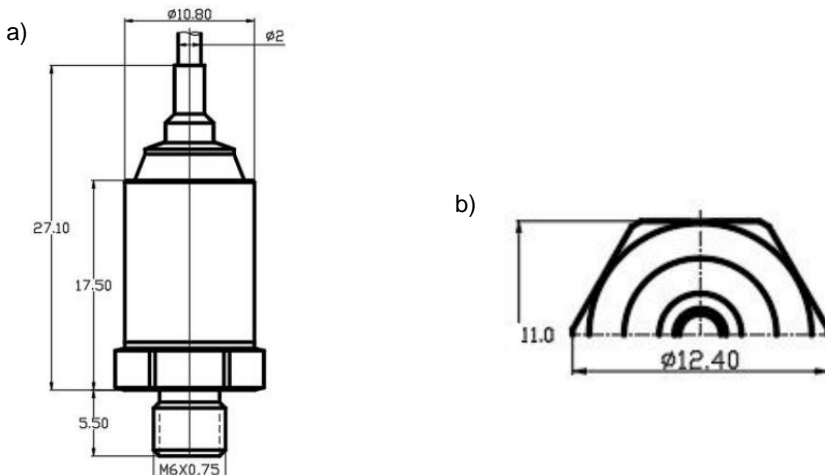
Mechanical Dimensions of SSA-P8HIBX model: a) side view b) top view
